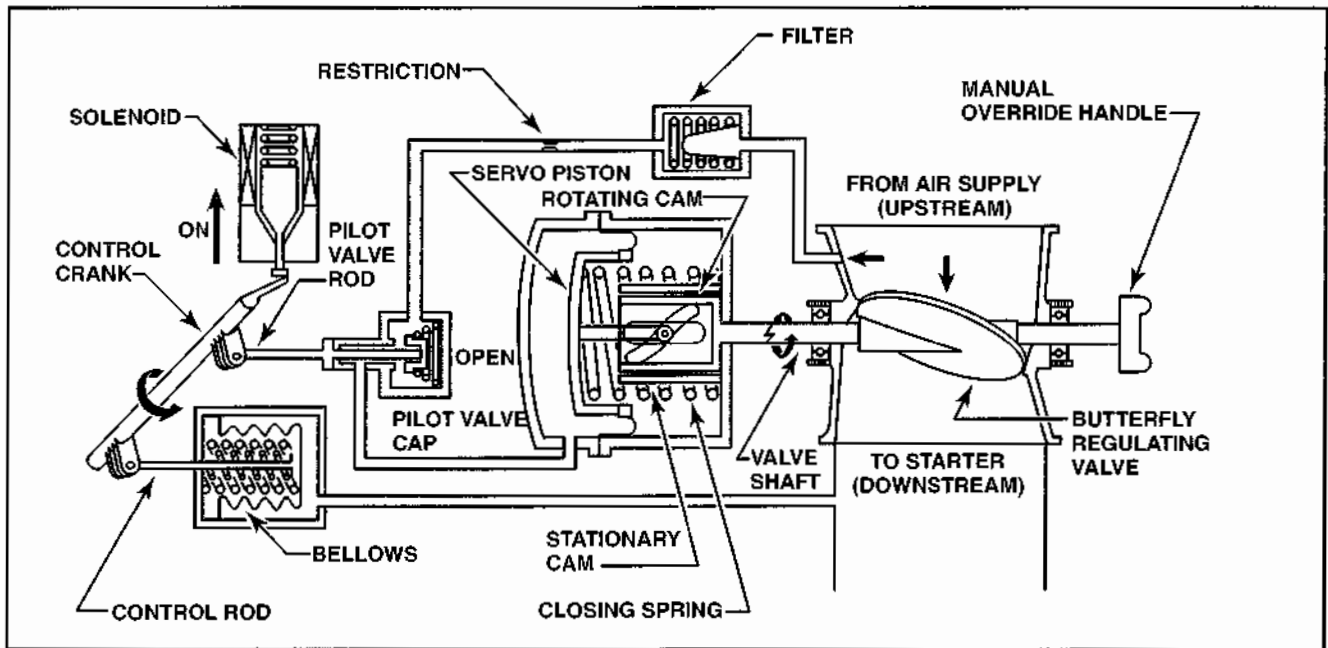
The air supply valve controls the amount of air that flows to a pneumatic starter turbine.
